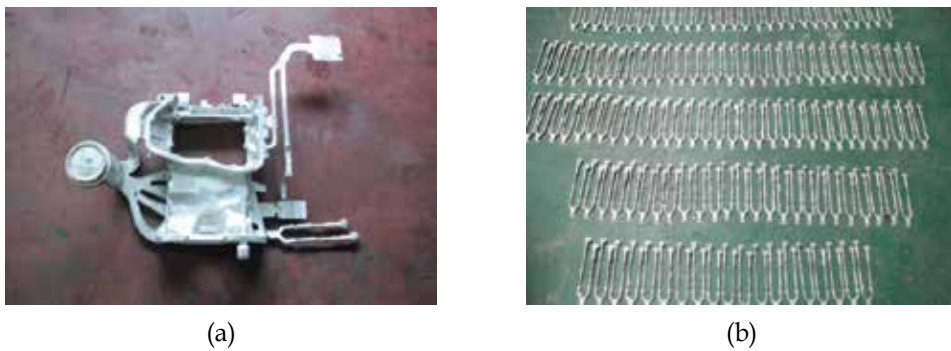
Photograph of oil pan produced by cold chamber diecasting of (a) AM60 Eco-Mg and (b) mechanical test specimens.
